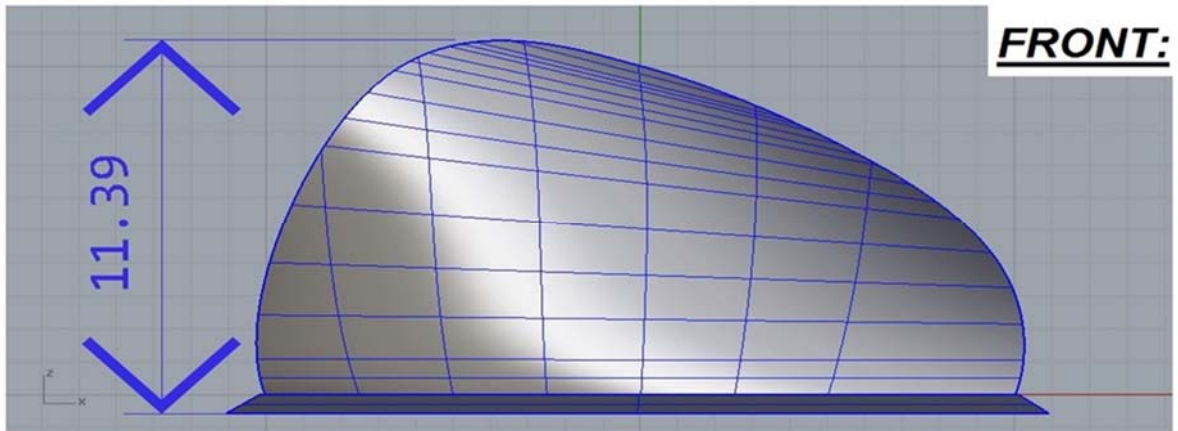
3D Output of the Elemental Propeller blade (Front view)
